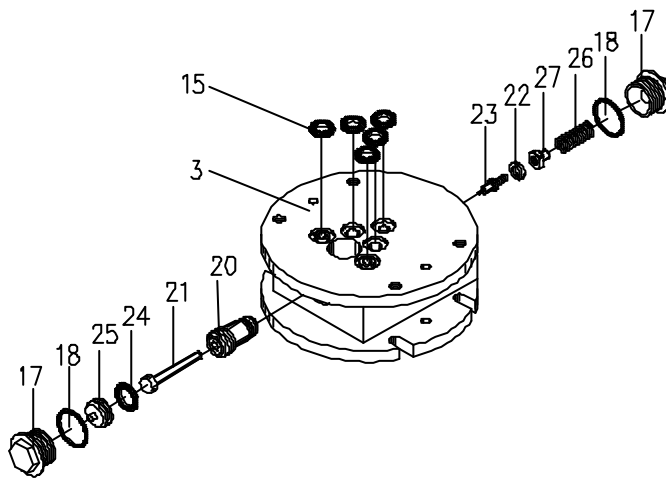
Assembly plate for adapter AEMD 4500 for robot
